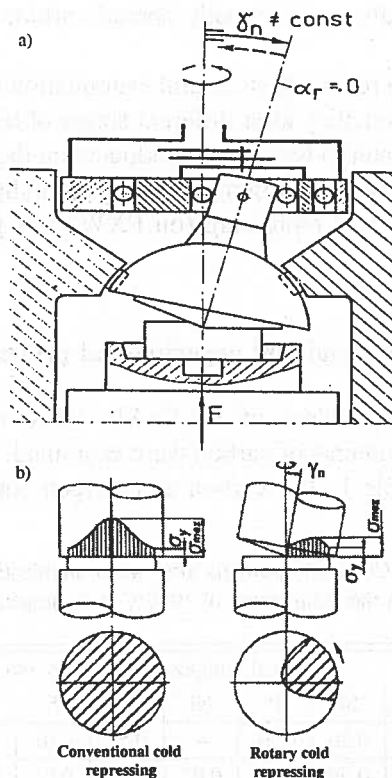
Schematic view (a) of the PXW100A press, (b) principle of rotary repressing
